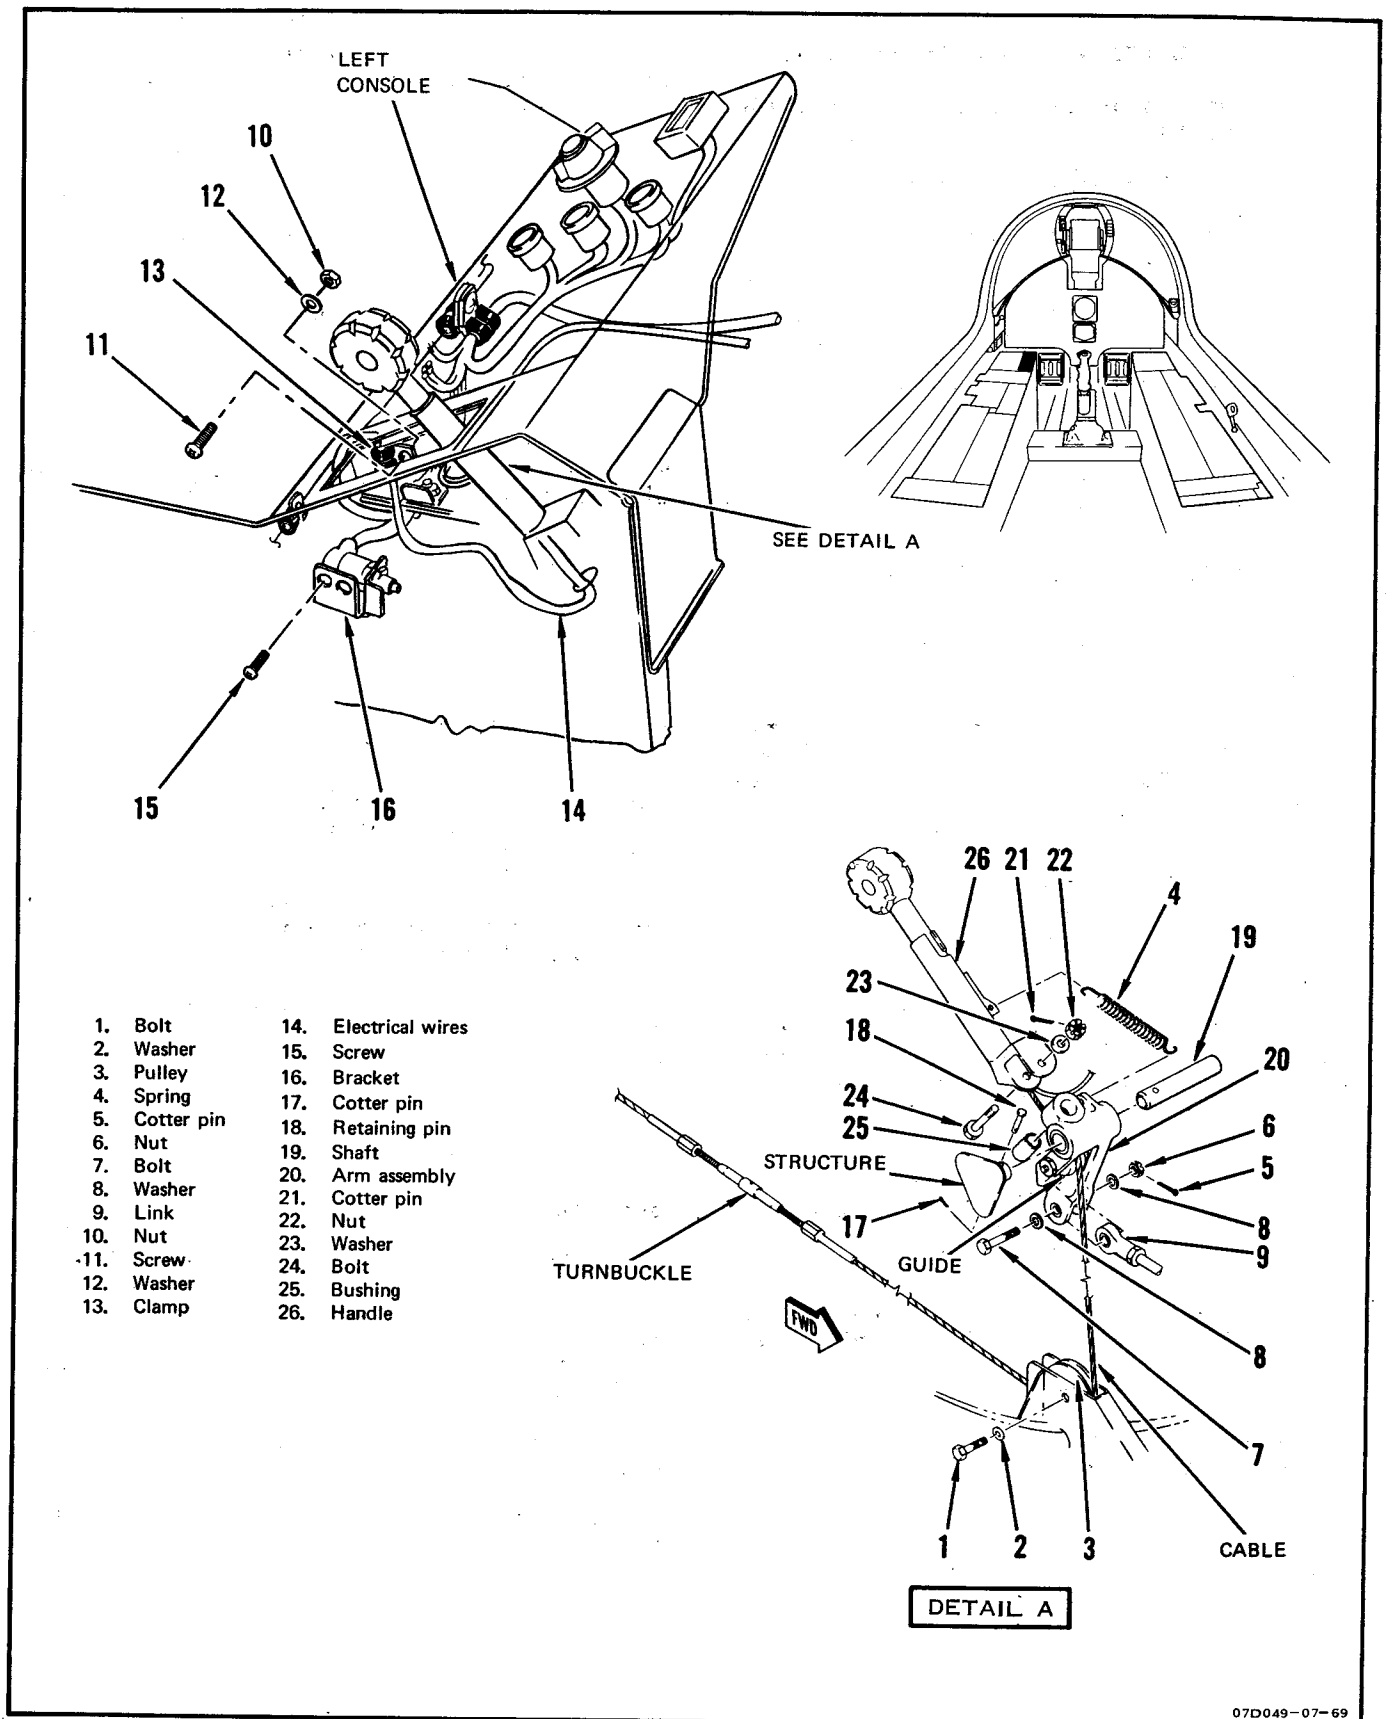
Landing Gear Handle Assembly Removal and Installation
